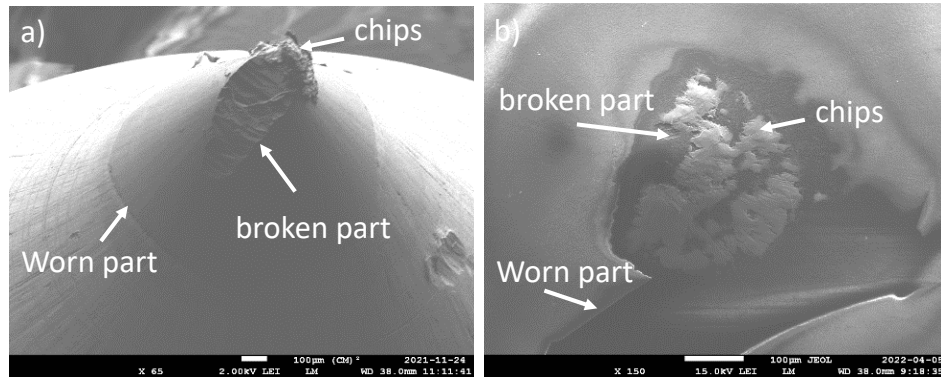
SEM pictures of tool tips after tests without grinding fluid a) the dressing tool, and
